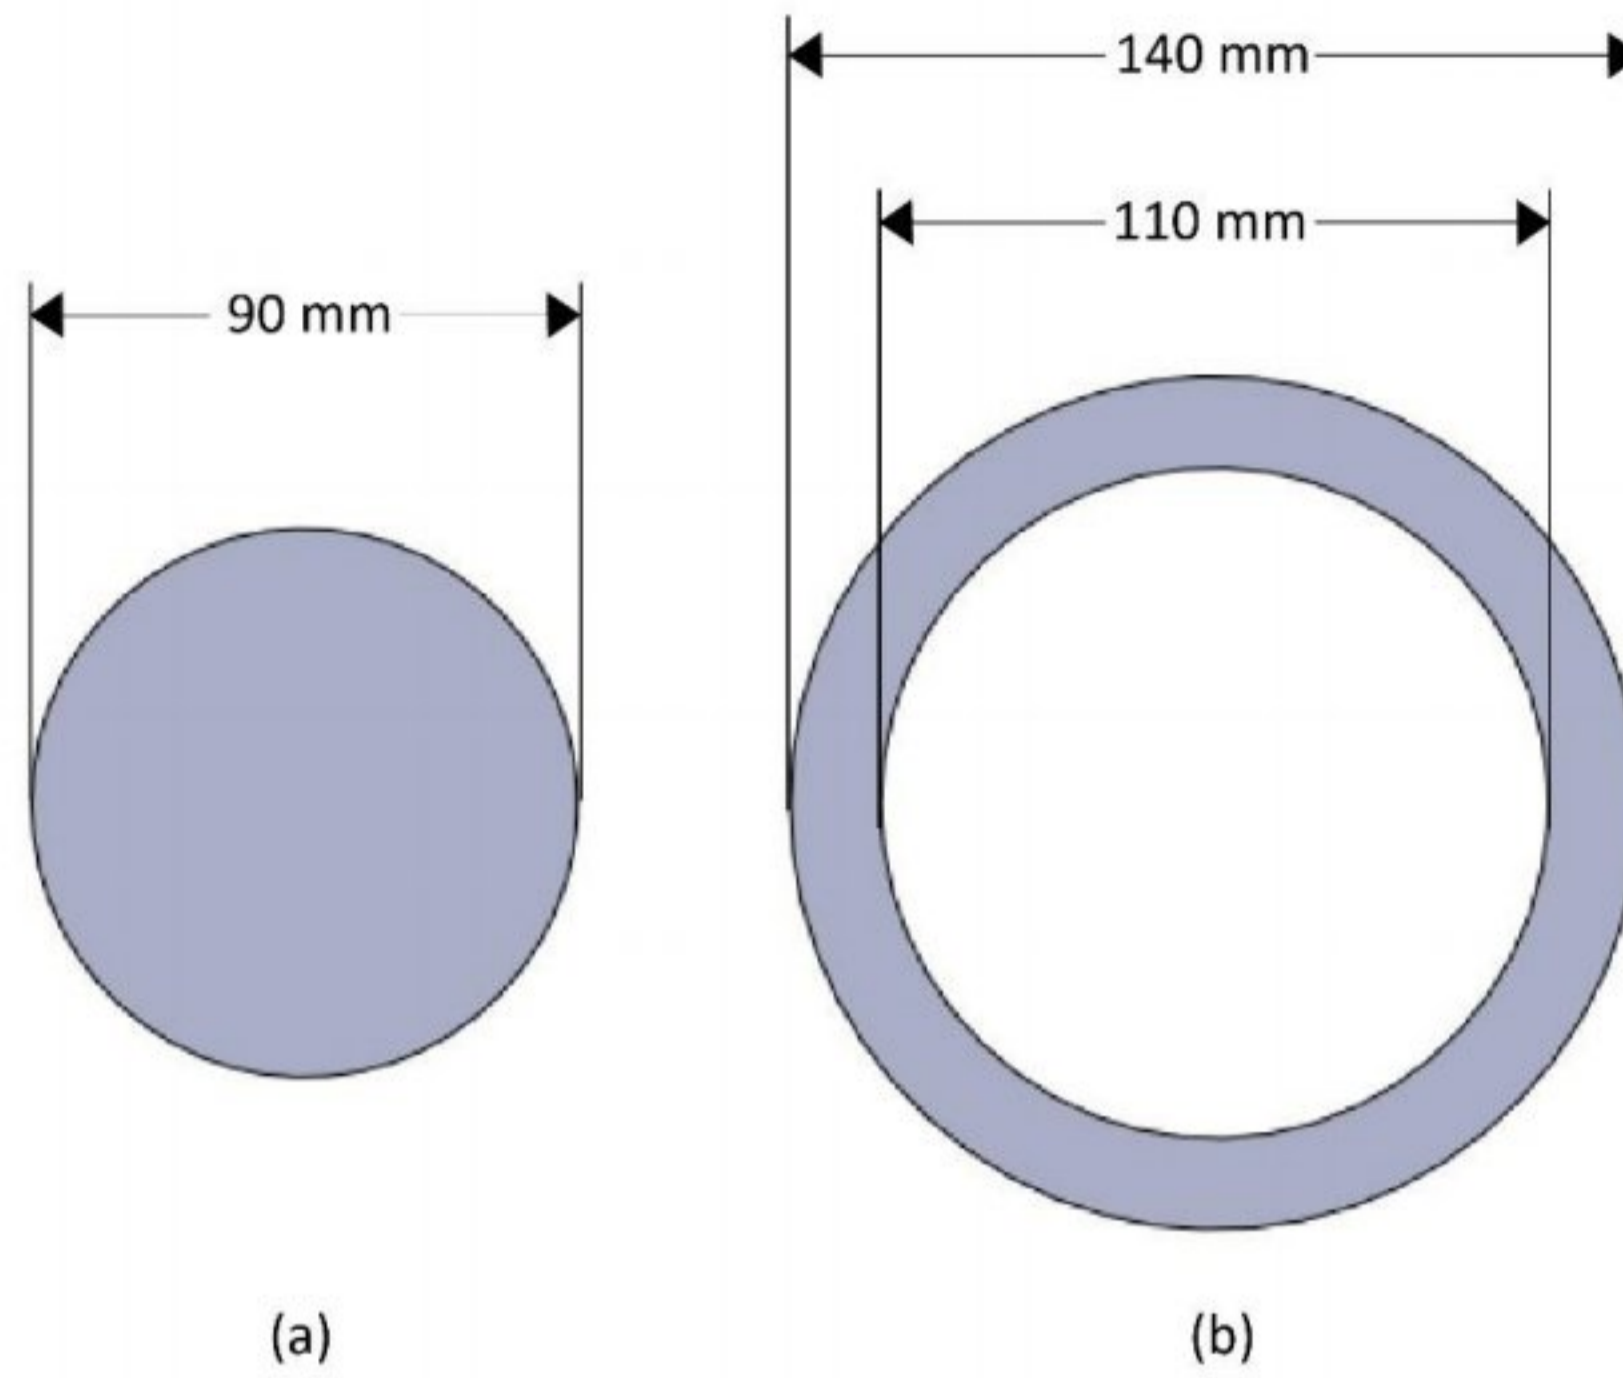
Dimensions of (a) Discs (b) O-rings used for baffles
